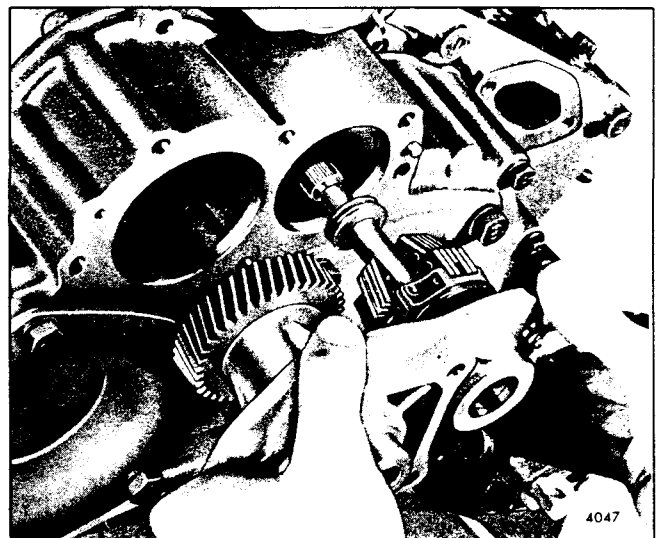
Removing/Installing Blower Drive Support (6V-53 Engine)
